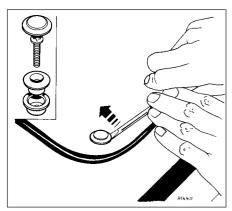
Prising out sunroof glass panel screw caps (Sec 28)
